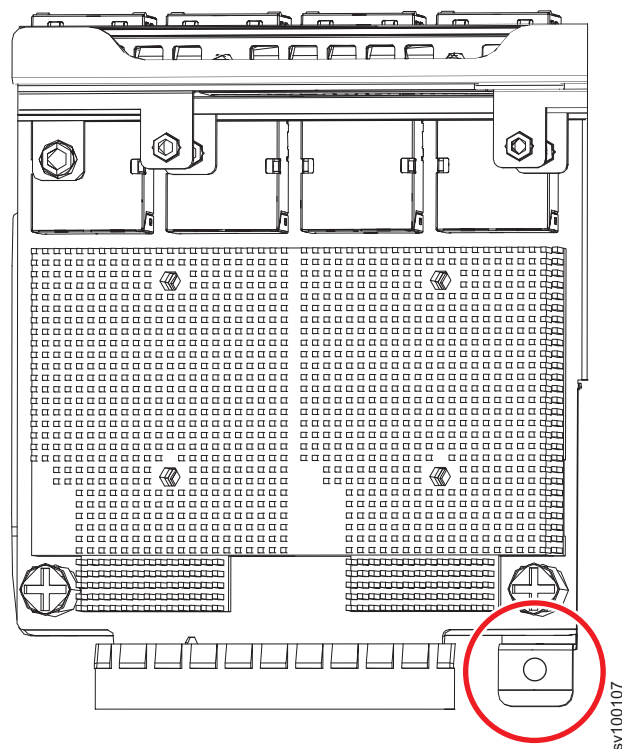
Location of the screw on the 2145-SV1 Ethernet chassis
